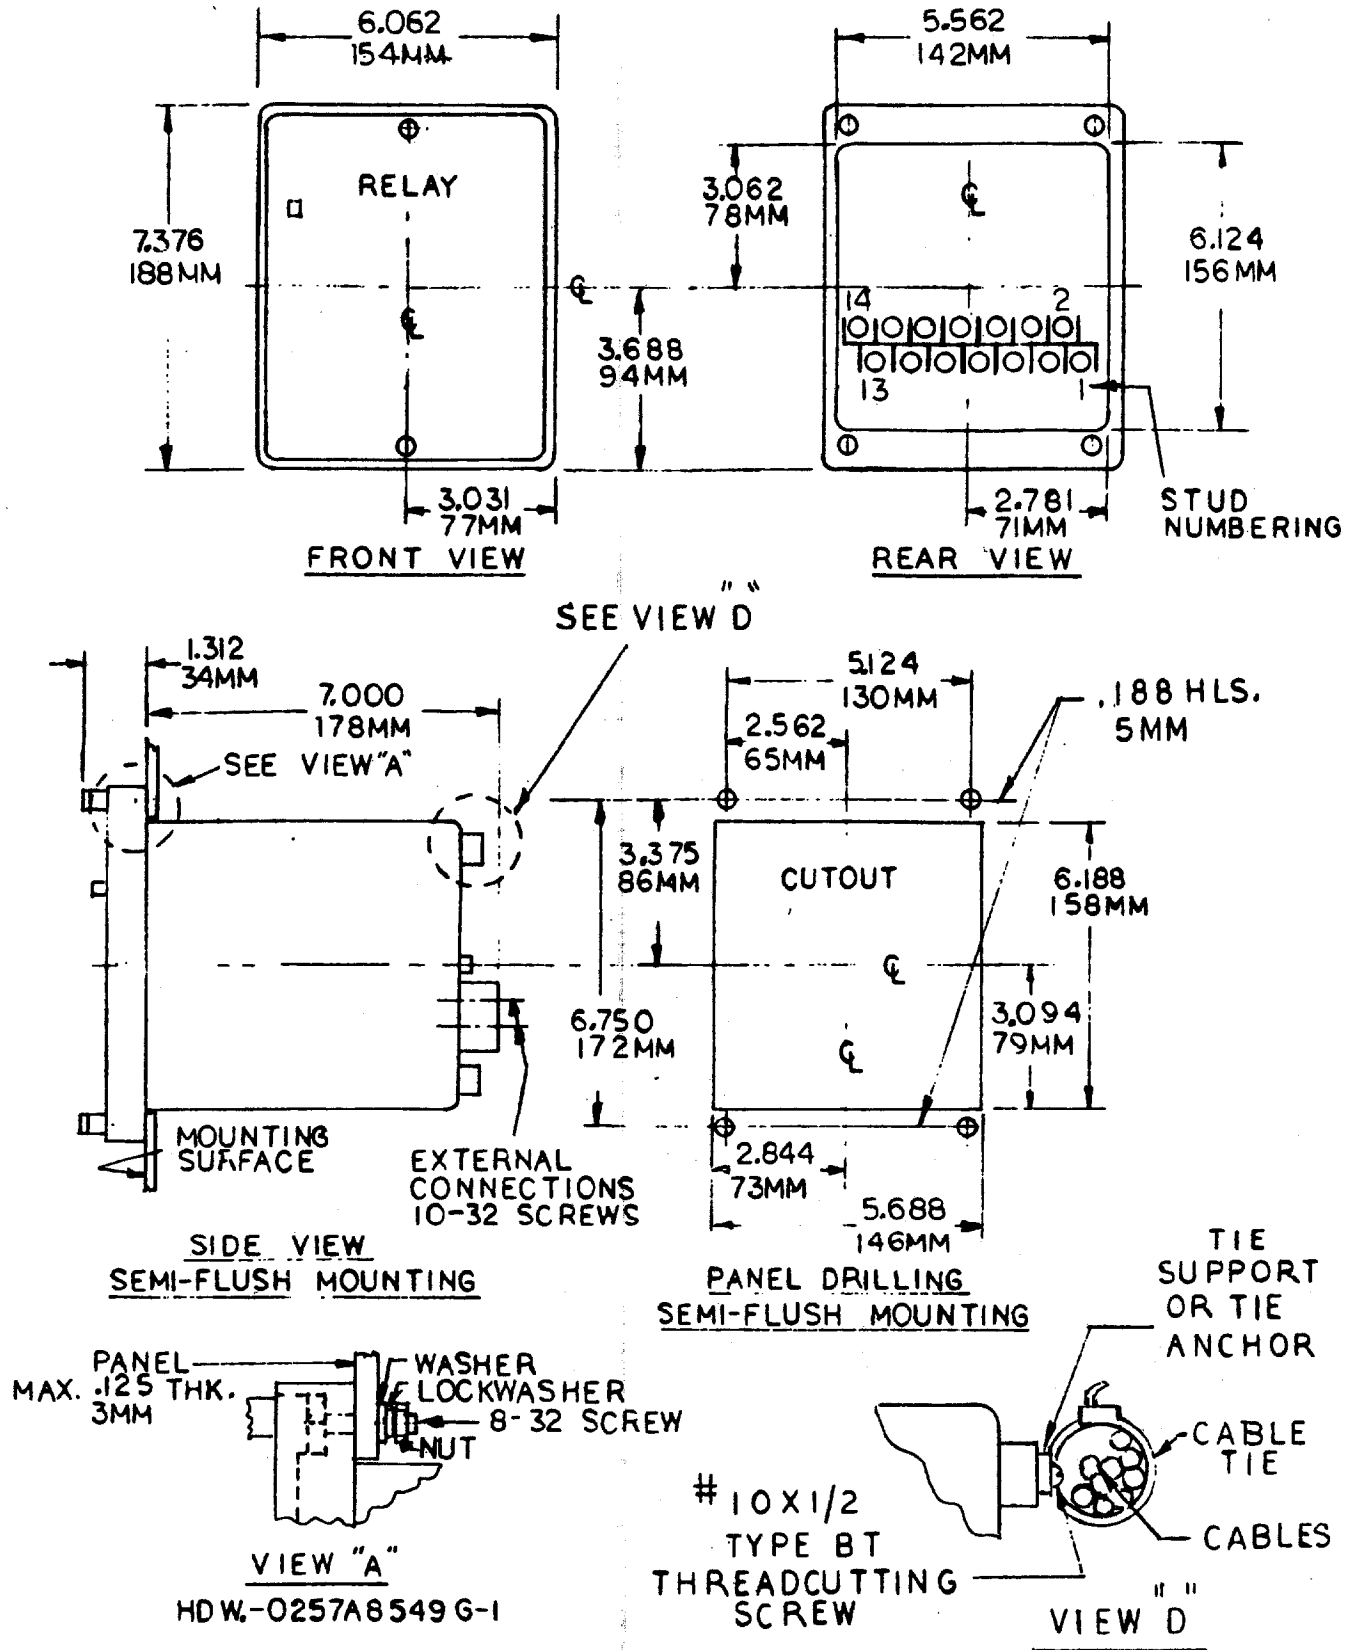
(0257A8452-2 SH. 1) OUTLINE AND PANEL DRILLING FOR RELAY TYPE IFC66
